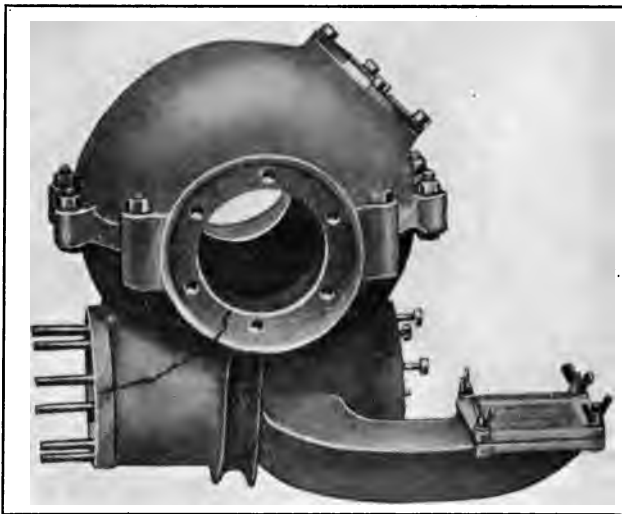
FRACTURED ALUMINIUM GEAR CASE.
